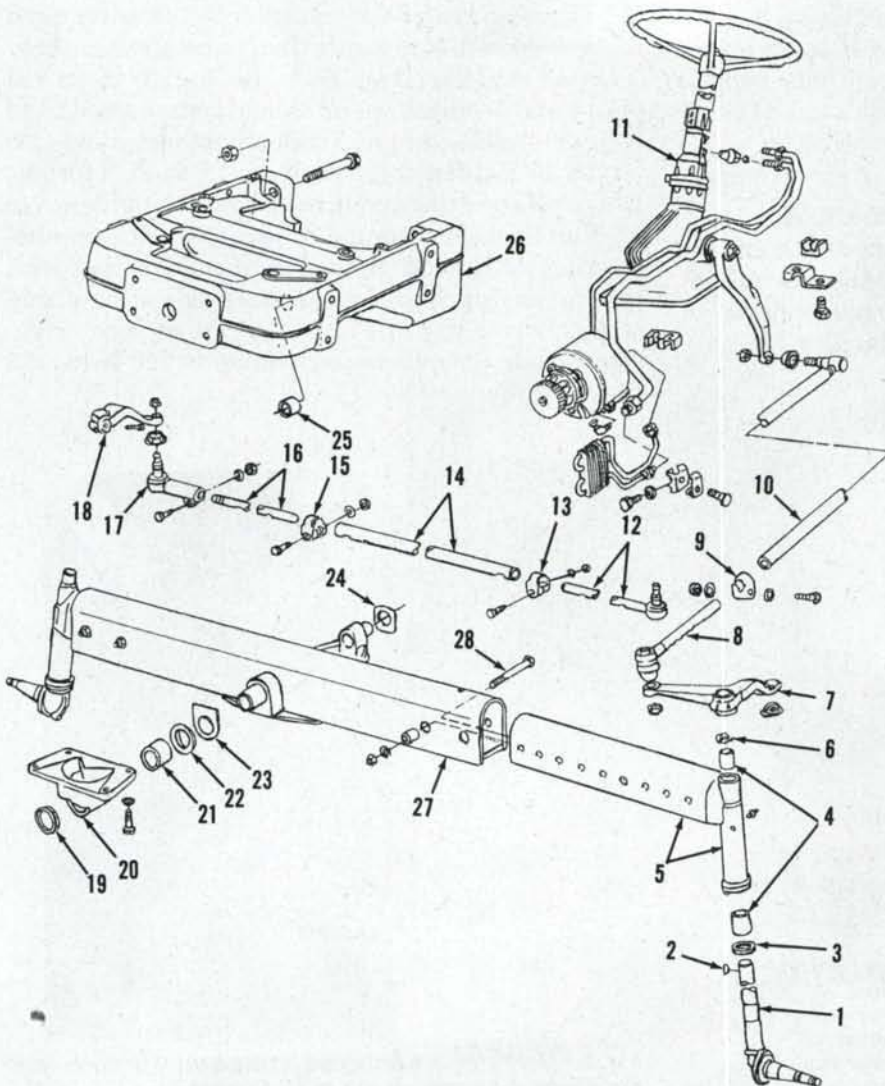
Exploded view of row crop, two-wheel-drive front axle, typical of models with power steering (shown) and manual steering.
